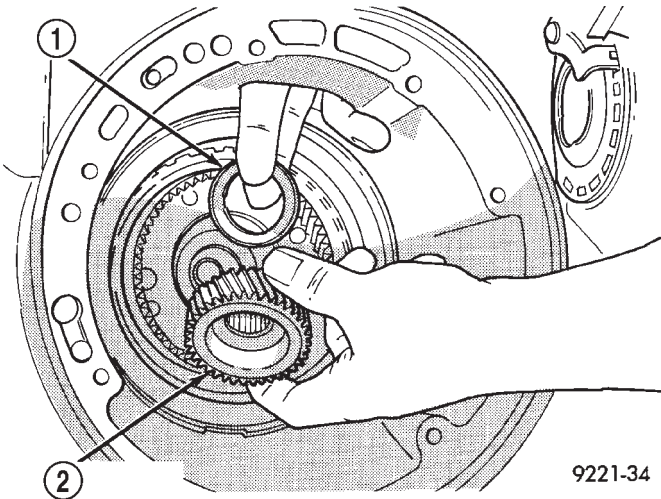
Install Rear Sun Gear and #7 Needle Bearing
